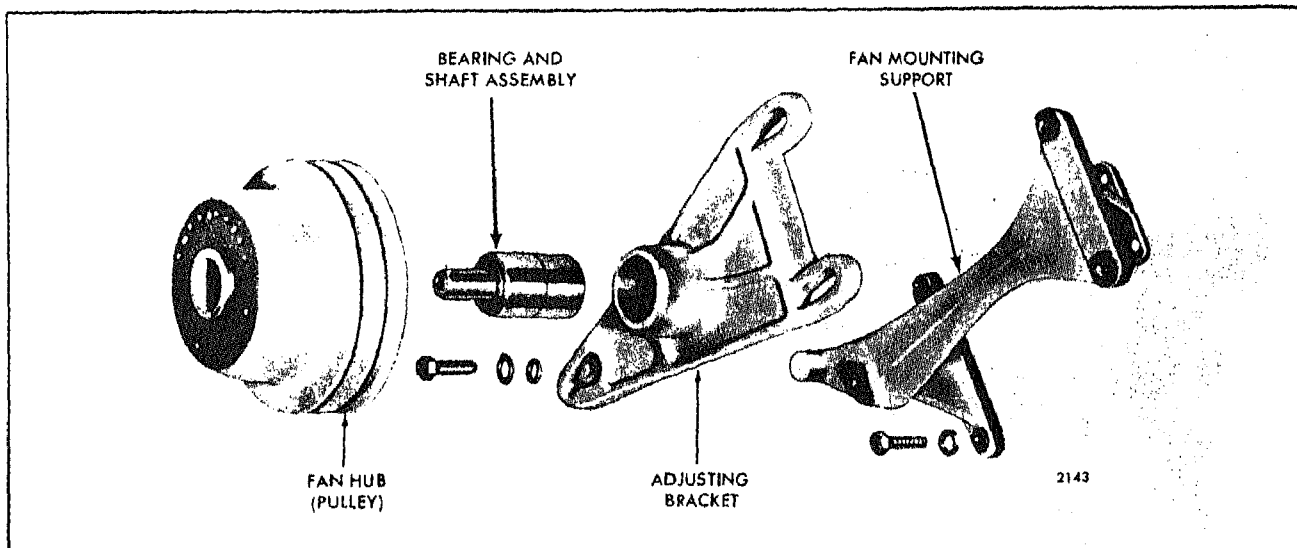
Typical Fan Hub and Adjusting Bracket Details and Relative Location of Parts (In-Line Engine)
